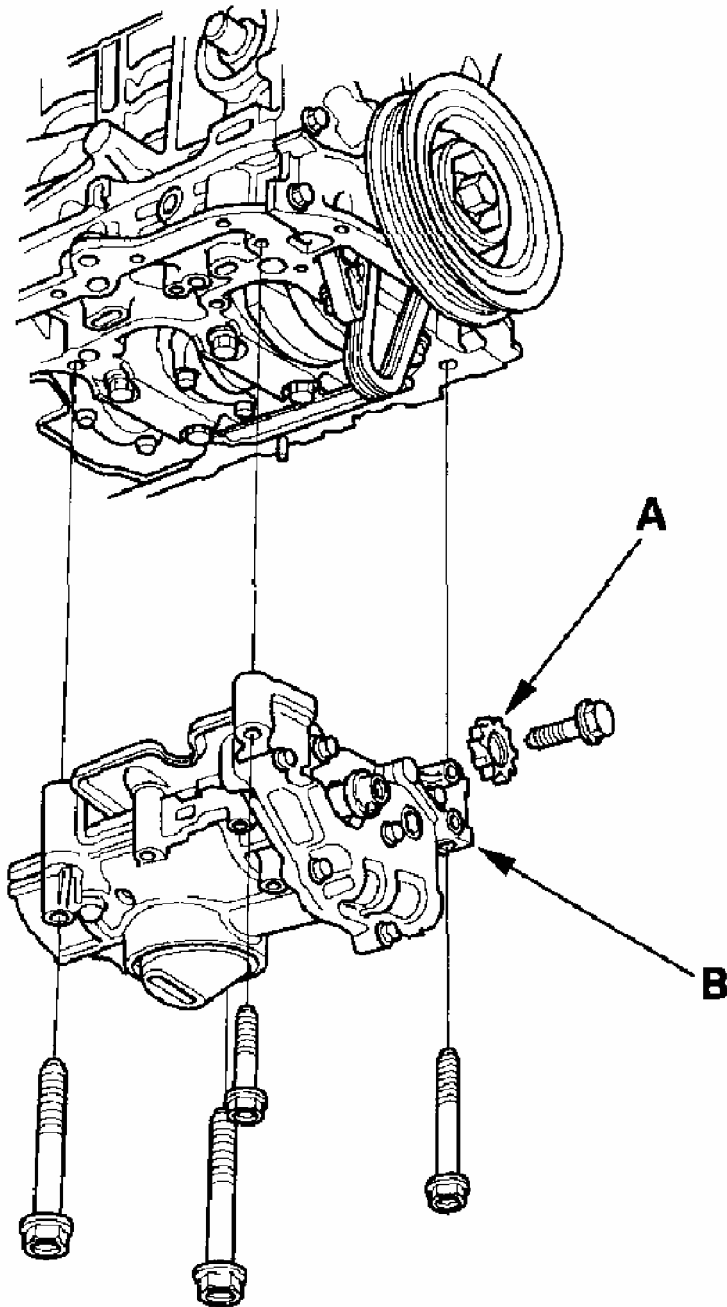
Inserting Pin Driver Into Maintenance Hole In Lower Balancer Shaft Holder
